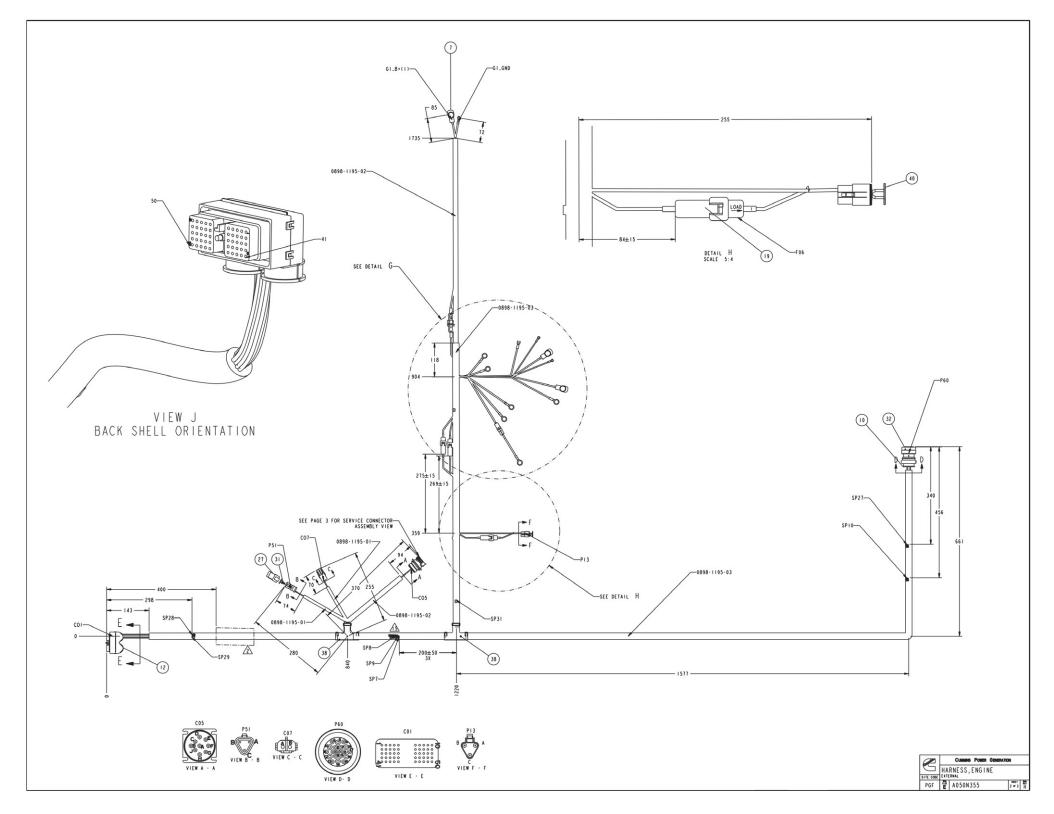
A050N355 ENGINE HARNESS (SHEET 2)
